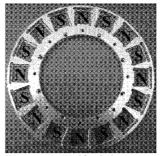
Half of the rotor, composed of 16 magnets, mounted alternately
